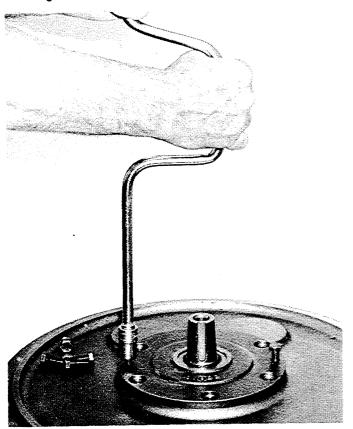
Using Pusher Screws to Remove Input Bearing Support.
